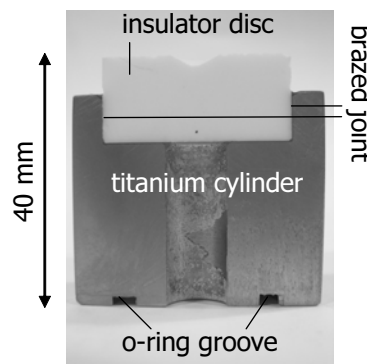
Cross-section of the simple test object used in this study to explore the usability of vacuum brazing for manufacturing vacuum-tight joints.
